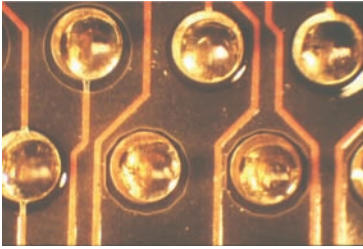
Close-up view of poor solder coverage on the surface of through-hole pads.
